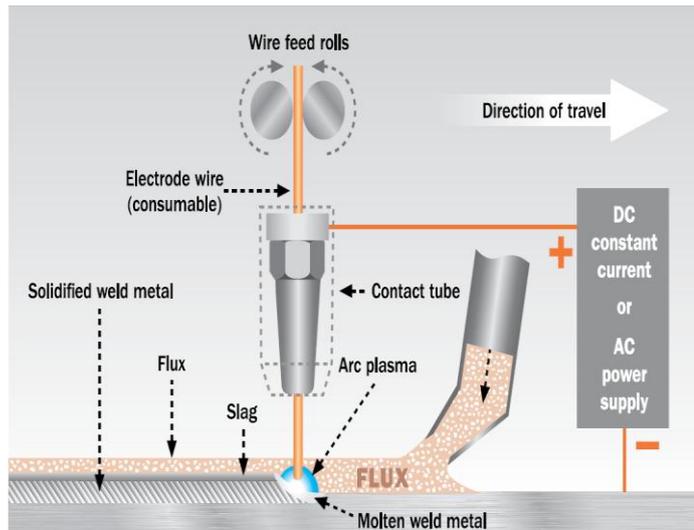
Submerged arc welding process (SAW) [4].
